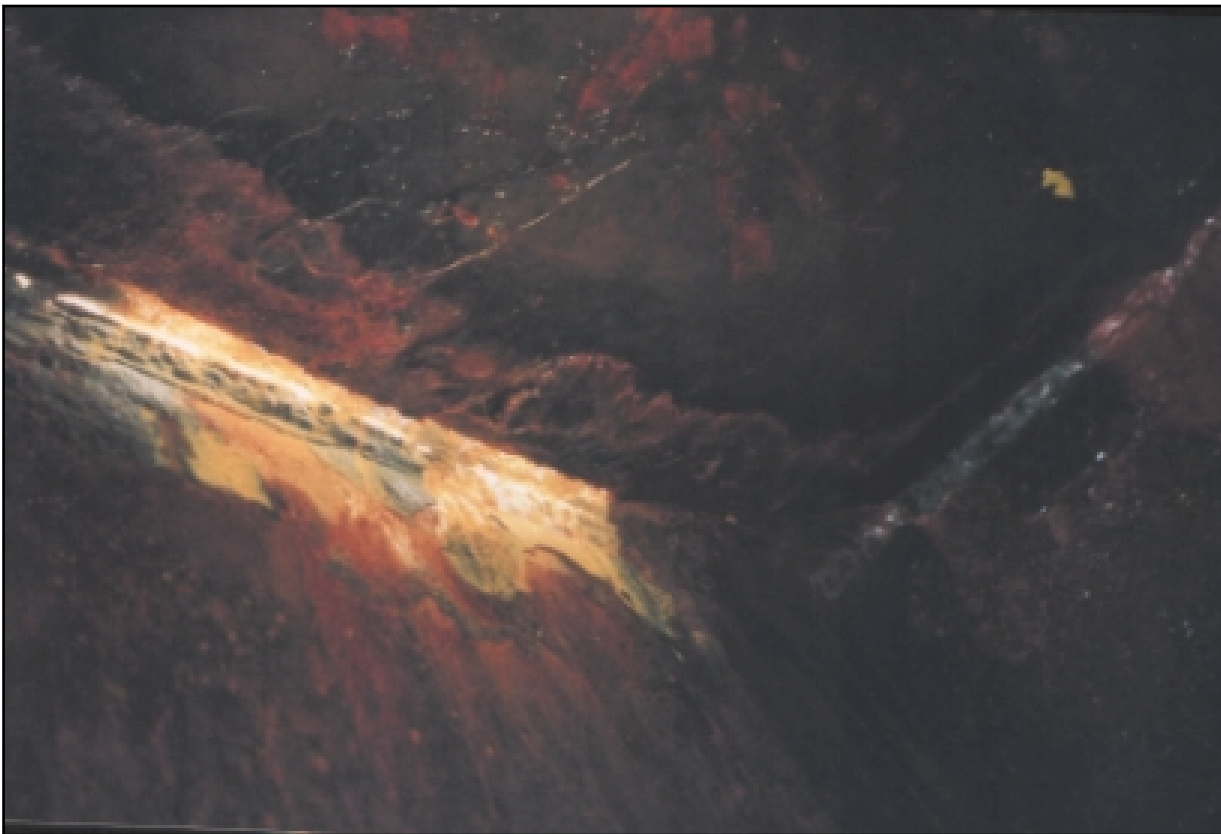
view of 1.6 m crack from within ballast tank
